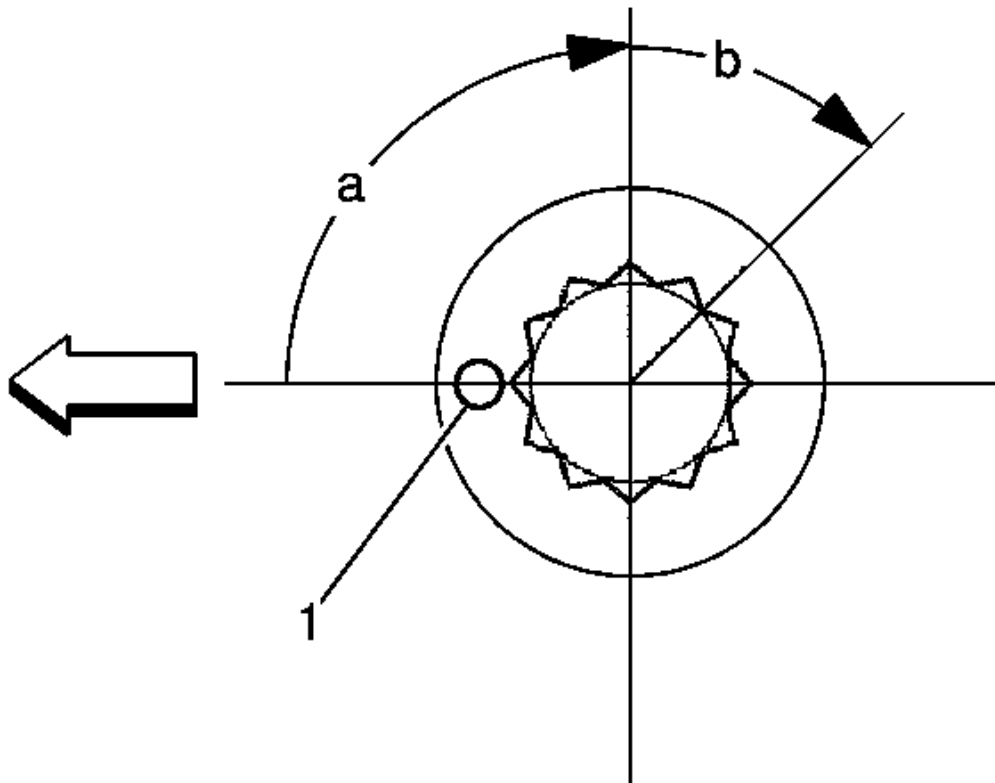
Marking Front Side Of Cylinder Head Bolts For Final Tightening Pass
